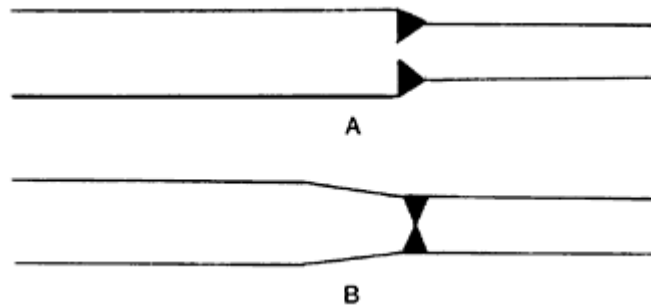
Abrupt section changes should be avoided in stressed joints. Type A is not acceptable due to lack of penetration of weld and the high stress concentration at the toe of the weld. A satisfactory design is shown as Type B.
